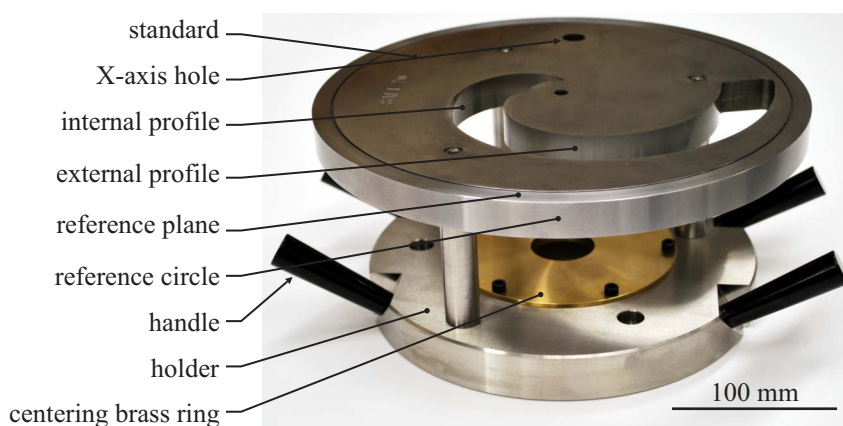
Involute scanning artifact (SAFT) mounted on its holder.
